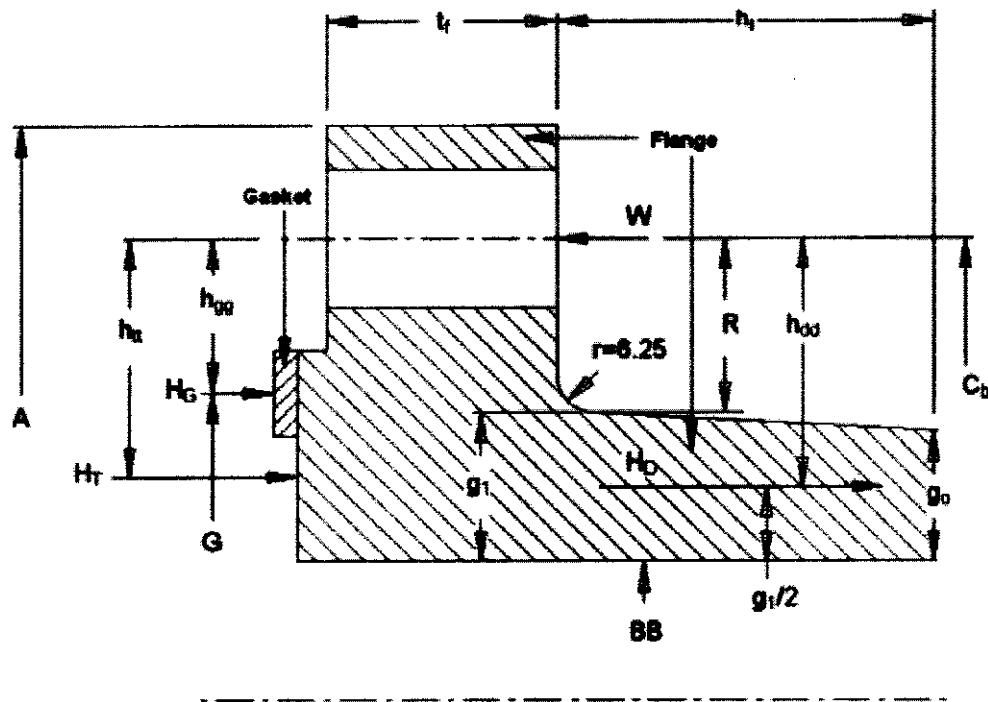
ASME VIII Appendix 2 flange dimensions
